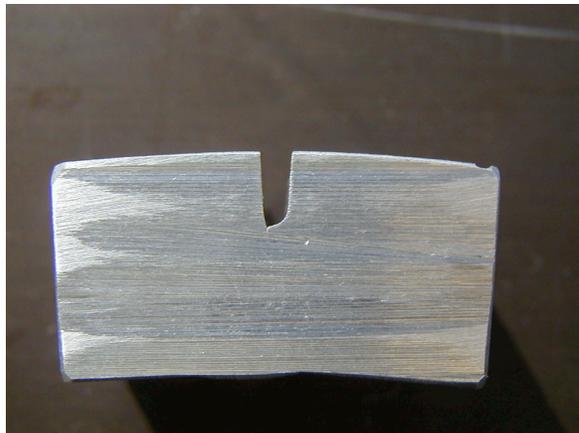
Weld Sample 1- Cross Sectioned
